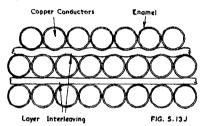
J. Section through layer interleaved winding (Ref. C29).
